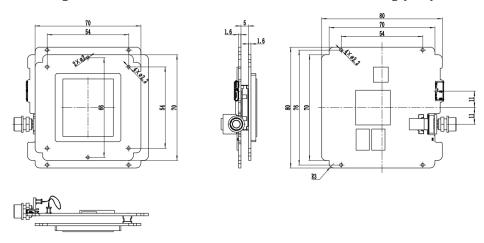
Dimensions of SCCXXX-AFU-EF circuit board (mm)
